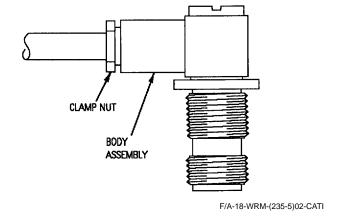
101-T4100A-75 Coax Connector Repair (Sheet 3)
